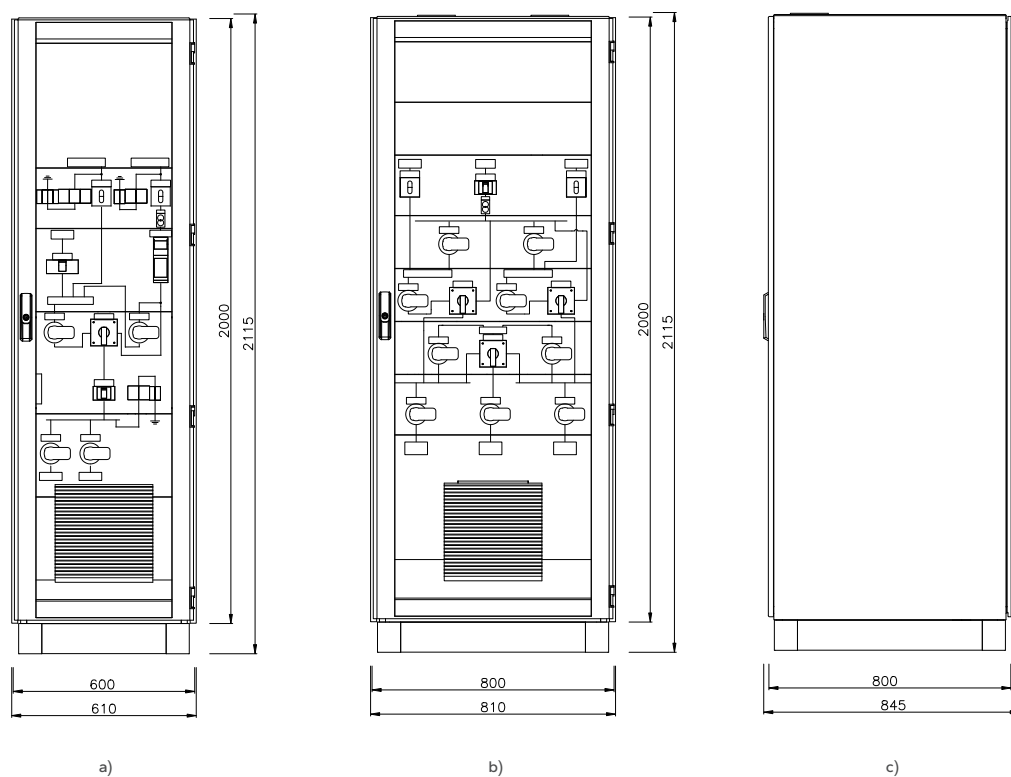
Views with dimensions of the TP type switch cabinet:
